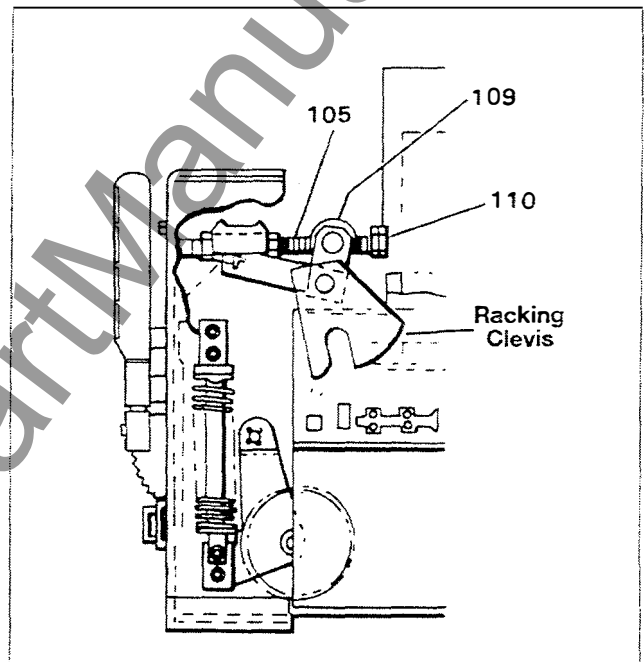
Detail of Typical Racking Mechanism and Drawout Interlock
